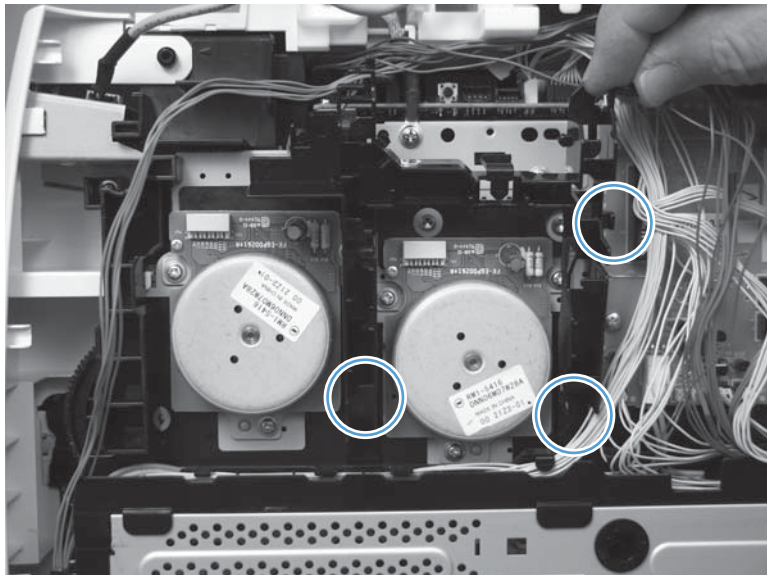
Remove motor M1 and motor M2 (6 of 6)
